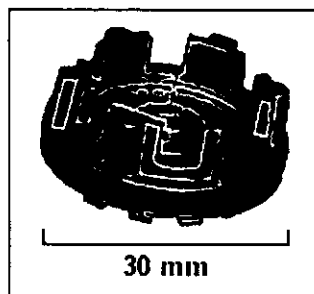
2 CAD image of 'Dyson' clutch housing
